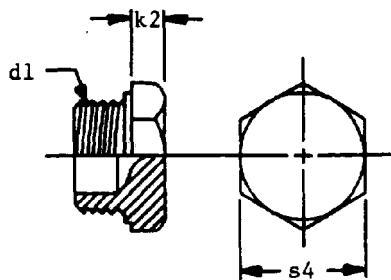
TYPE D HEXAGON OUTSIDE HEAD PLUGS
